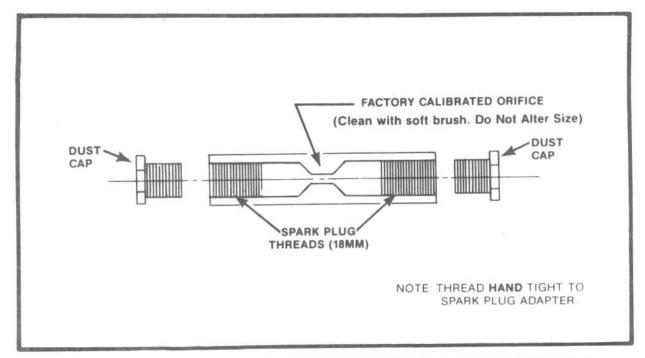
MASTER ORIFICE ASSEMBLY TOOL BORROUGHS P/N 646953.
